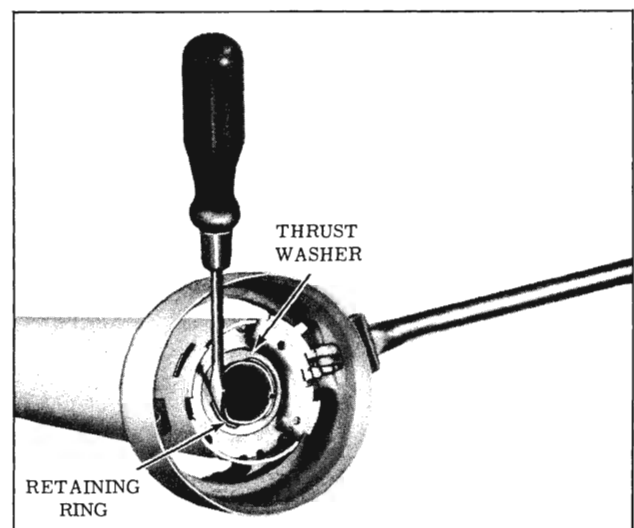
Removing Shift Tube Upper Retaining Ring
